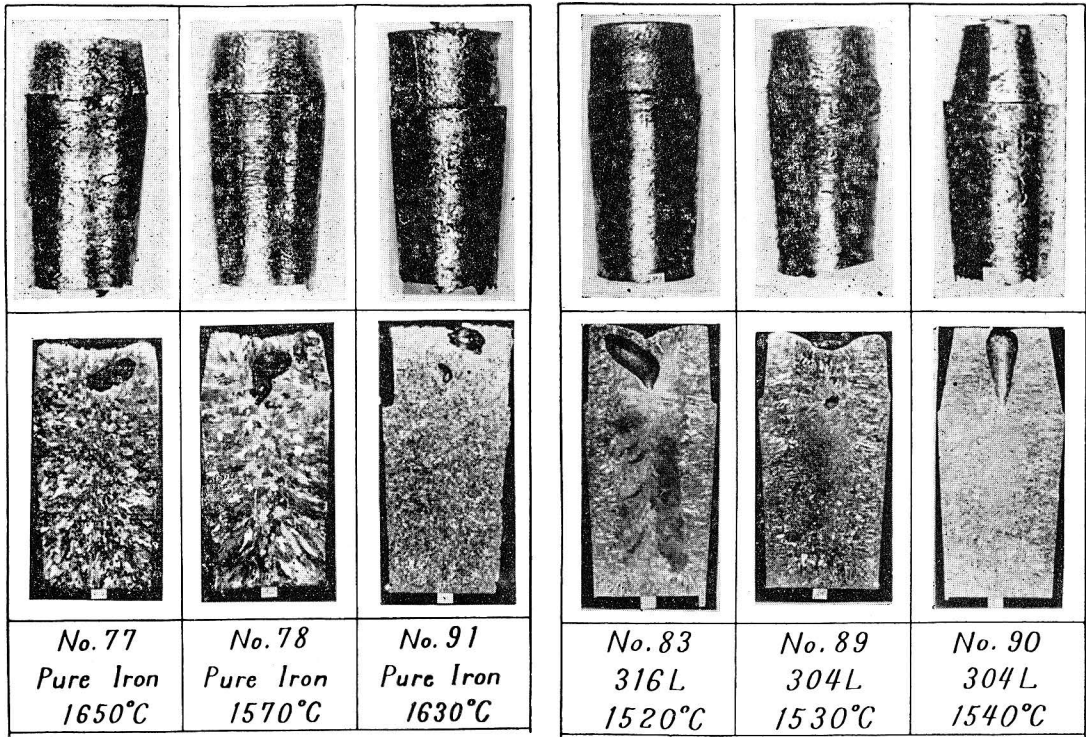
The ingotism of pure iron by the modified mold assembly.
